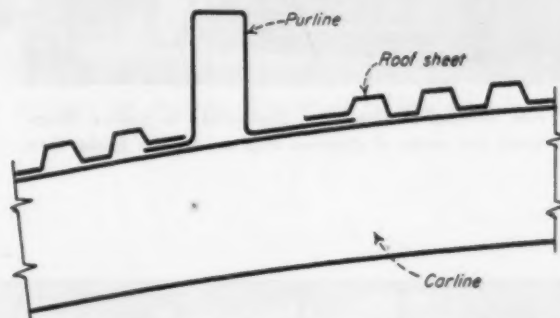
Three stainless parts are welded into one in this roof assembly, typical of Shotwelding.
